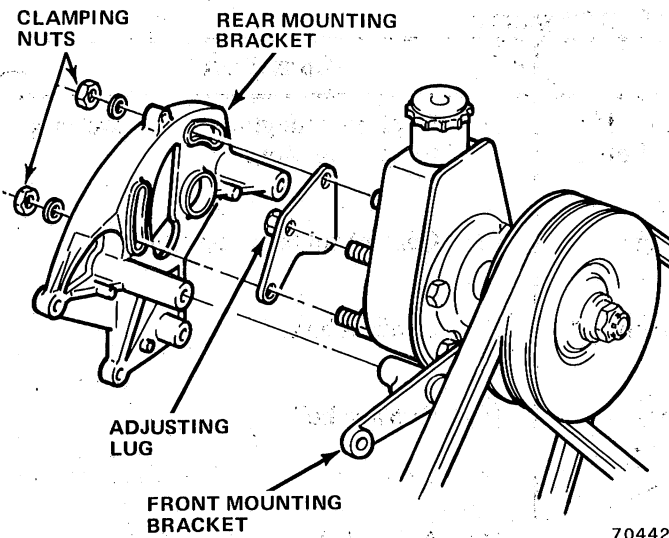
C-23 Eight-Cylinder Engine Power Steering Pump Drive Belt Adjustment
